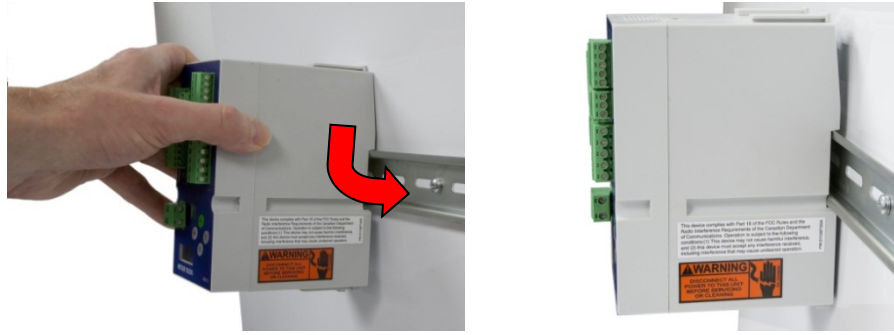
DIN Module Mounting – Engaging Tabs (left) and Seating on Rail (right)
